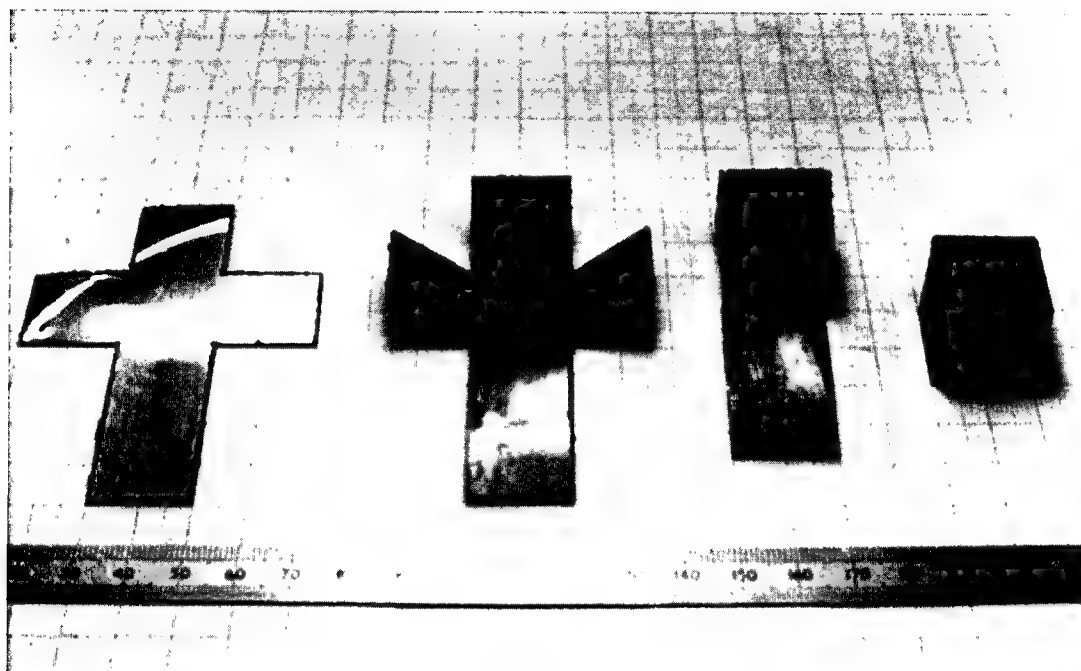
Typical Bend in 1mm and 2mm Thick Sheet
